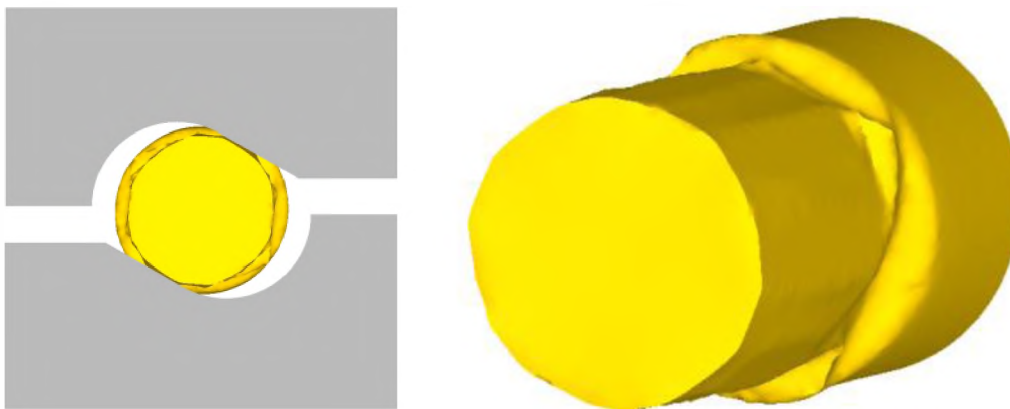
The shape of the workpiece after forging in the strikers of the new design.
